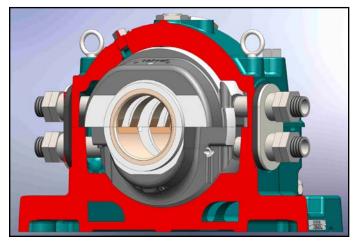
Cutaway view of a pillow block assembly showing the liner, which is commonly serviced, and the housing, which is commonly neglected of service. (Courtesy of Dodge)
